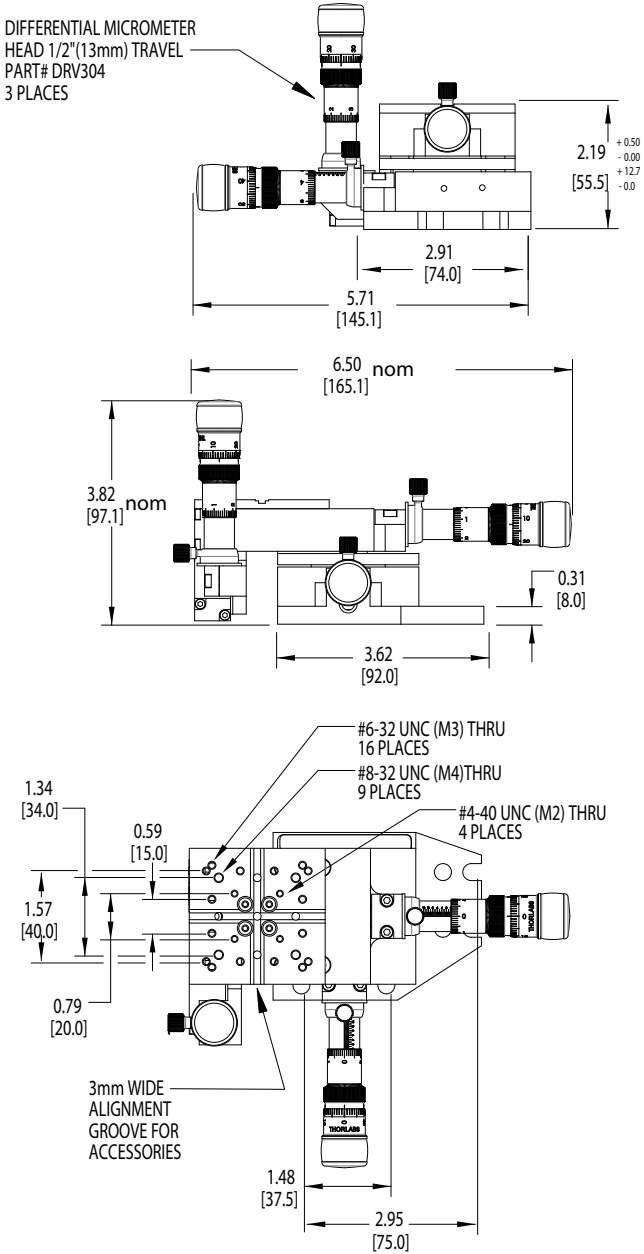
RBL13D Differential Drive RollerBlock Dimensions
